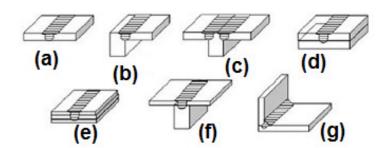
FSW joint configurations: (a) top simple, (b) top edge, (c) top T, (d) lap joint, (e) multiple lap joint, (f) lap joint T and (g) fillet joint (Mishra, 2005)
